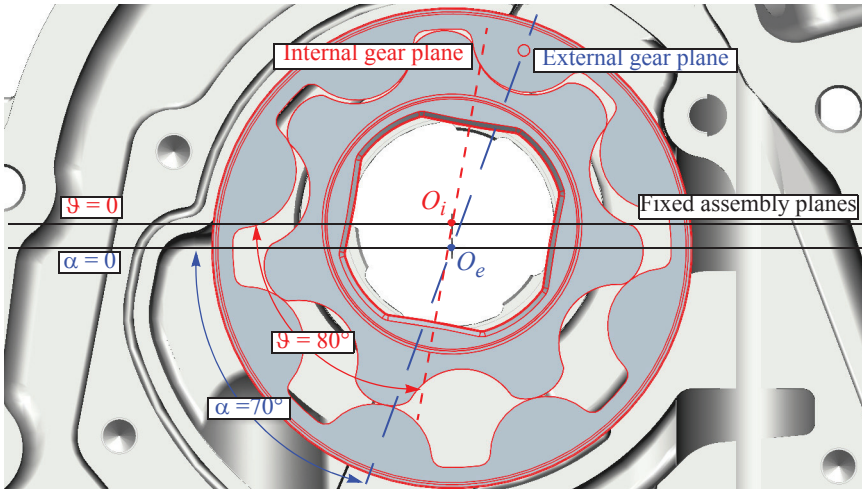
Assembly close-up front view with  $\alpha = 70$  degrees
